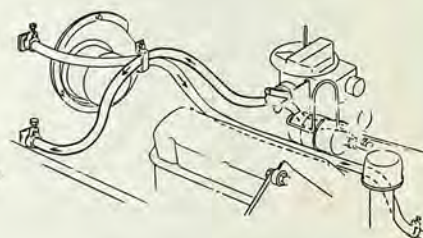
221 And 260 C.I.D. Engine Heater Hose Routing
